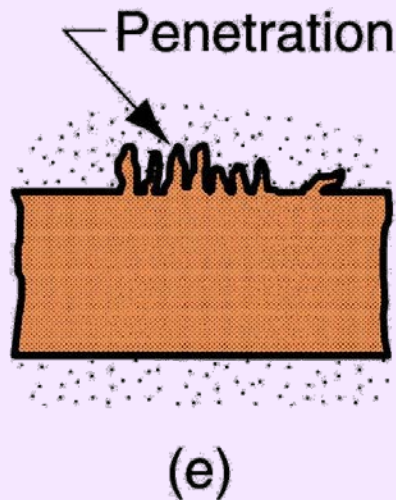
Common defects in sand castings: (e) penetration
